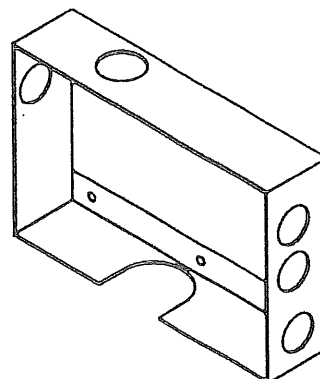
Model MB-P2 – Control Head Mounting Bracket.
